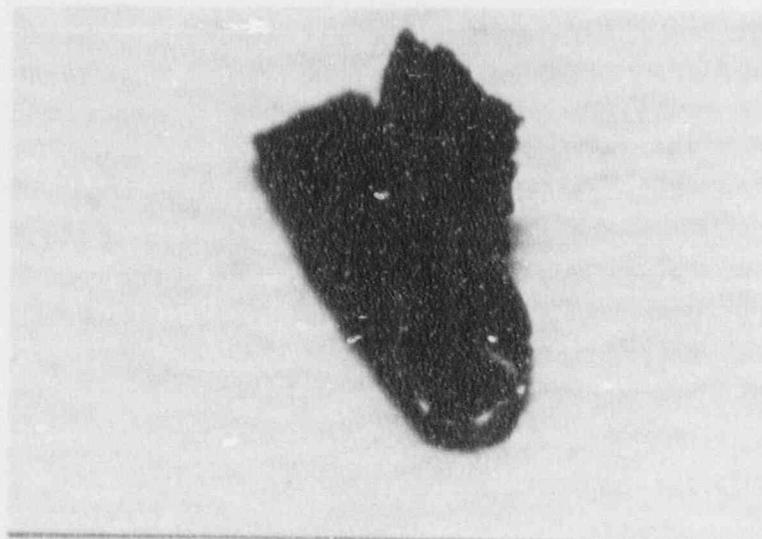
View of a metal fragment that was meshed in the gear train. Note, the fragment has taken the shape of the gear teeth.
